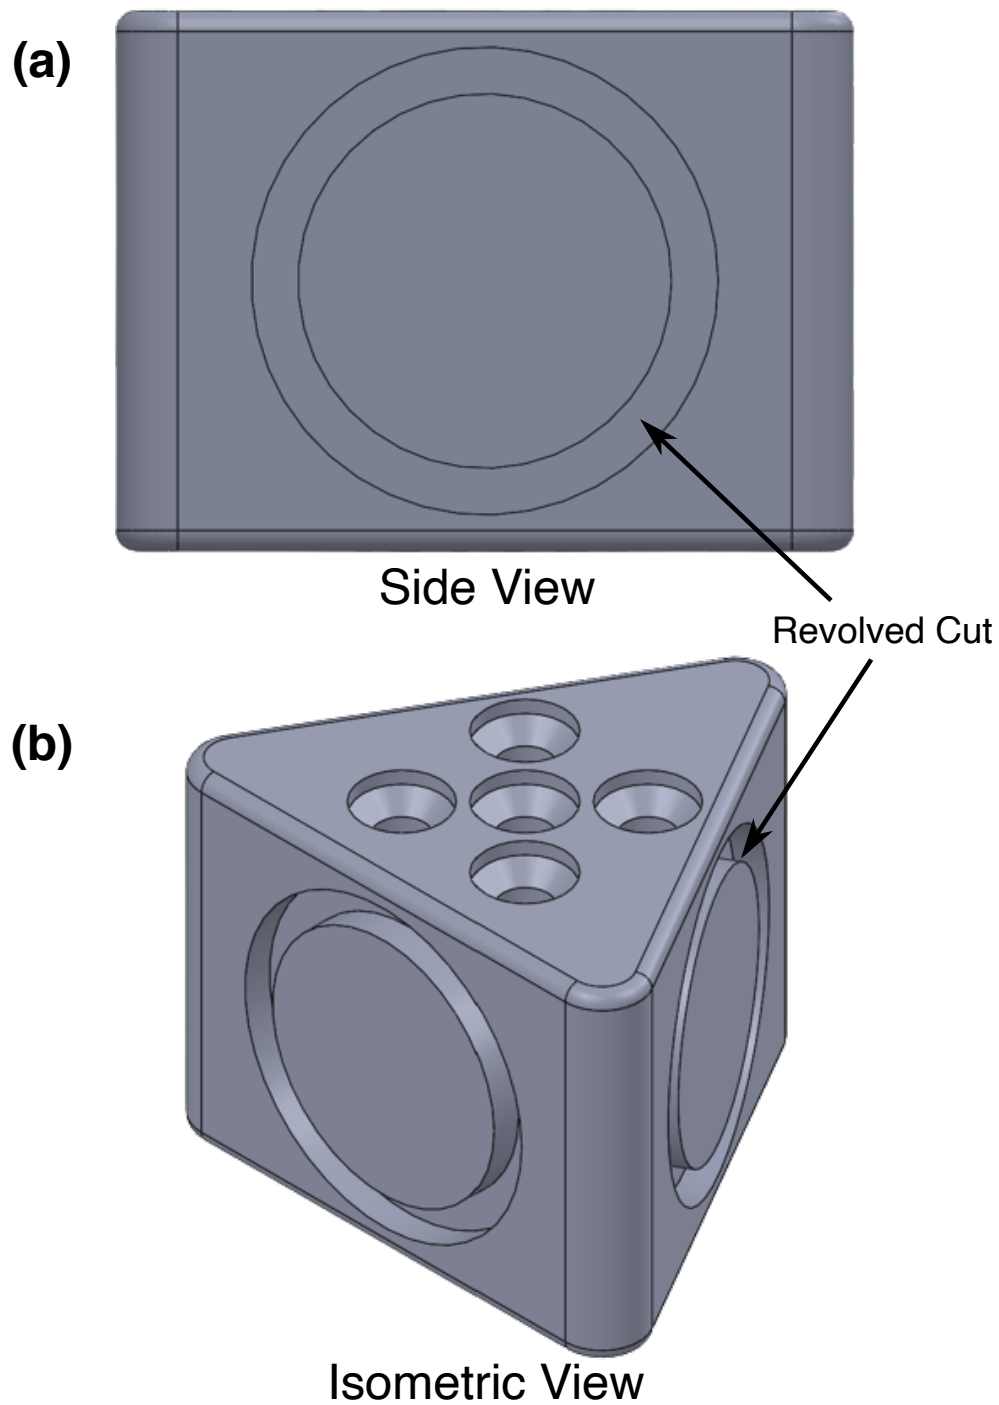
CAD model of the feedback head used in the delta mechanism. (a) Side view of the feedback head, and (b) Isometric view of the feedback head, both showing the revolved cut used to embody the actuator flanges.
